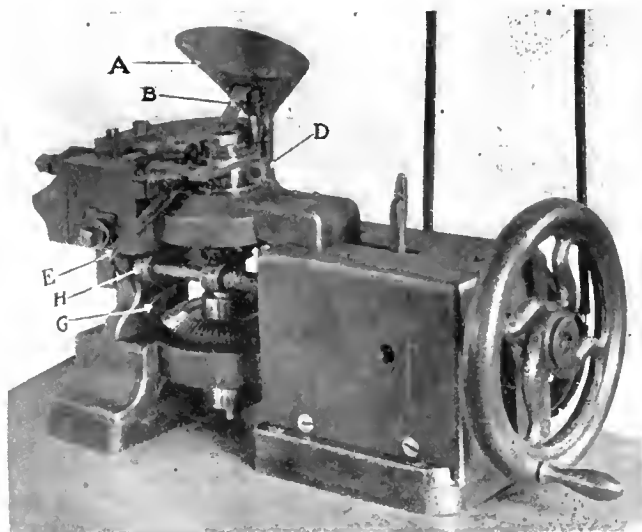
THREAD ROLLING MACHINE OPERATING SIDE
